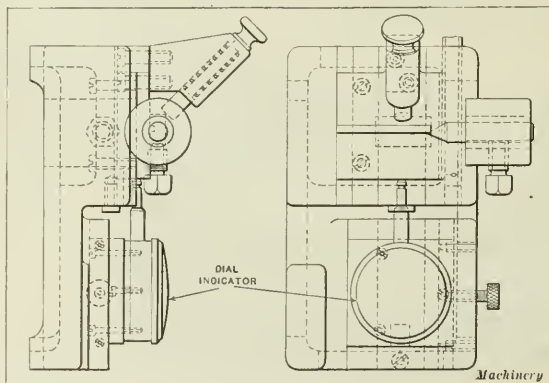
Fixture for testing Lead of Opening Die Chasers
